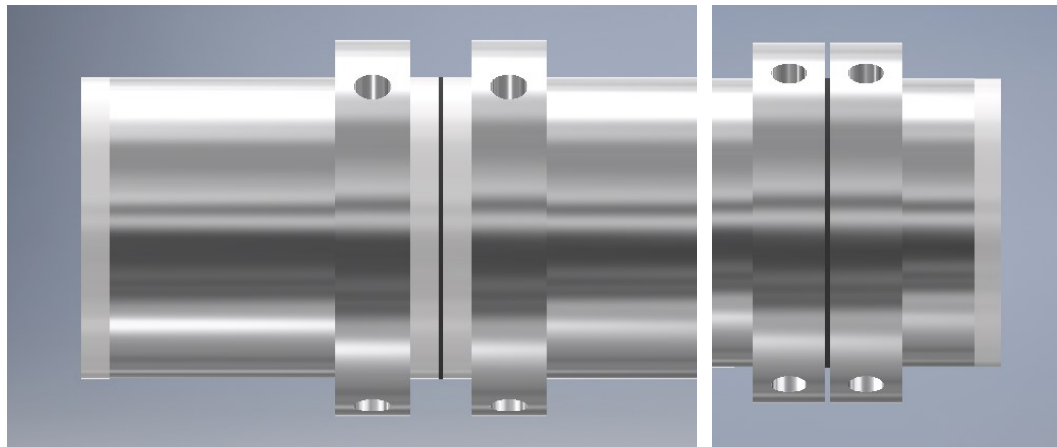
(a) Speaker Housing CAD Model (b) Two Material Housing CAD Model
